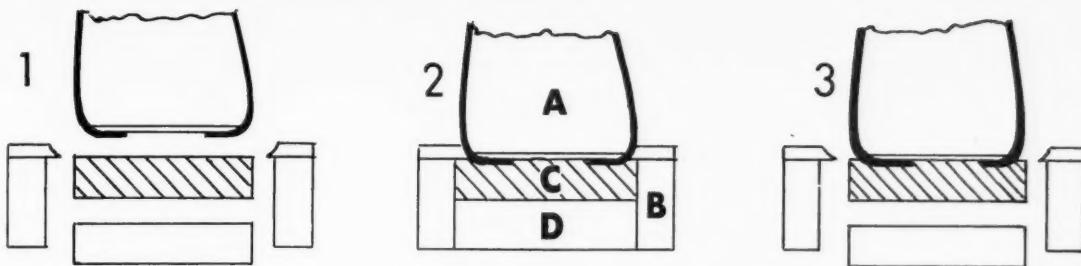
Schematic diagrams of mold and last assembly for external pressure machines: (1) Mold open, upper on last. (2) Mold closed and under curing pressure. (3) Cure completed, mold has opened automatically. *A* is metal last with upper; heated for low pressure; no heat for high pressure. *B* is electrically heated movable side rings. *C* is unvulcanized sole and heel rubber. *D* is hydraulically operated, electrically heated mold base
